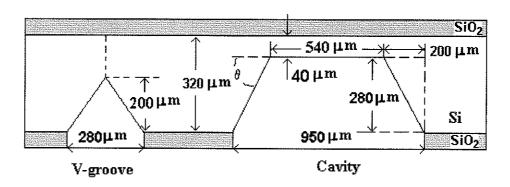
Designed dimensions of a cavity and a V-groove after KOH deep etch.
